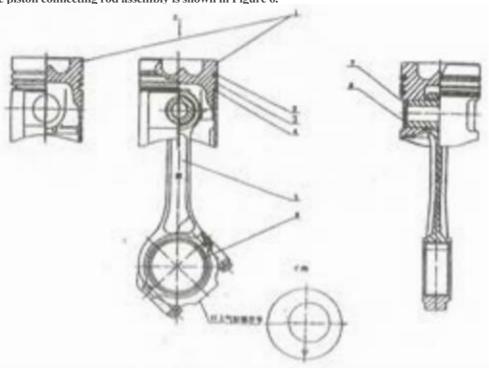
Piston connecting rod assembly 1 piston 2 first piston ring 3 second piston ring 4 oil ring 5 connecting rod section 6 connecting rod bushing 7 retaining ring 8 piston pin
